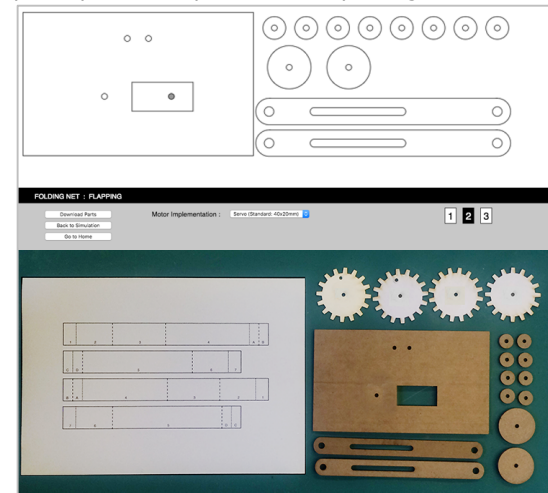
FoldMecha supports users to generate parts for the mechanical movement they designed and customize based on the prototyping plans: FoldMecha screen showing parts to customize and download (top) and printed and cut parts (right).
